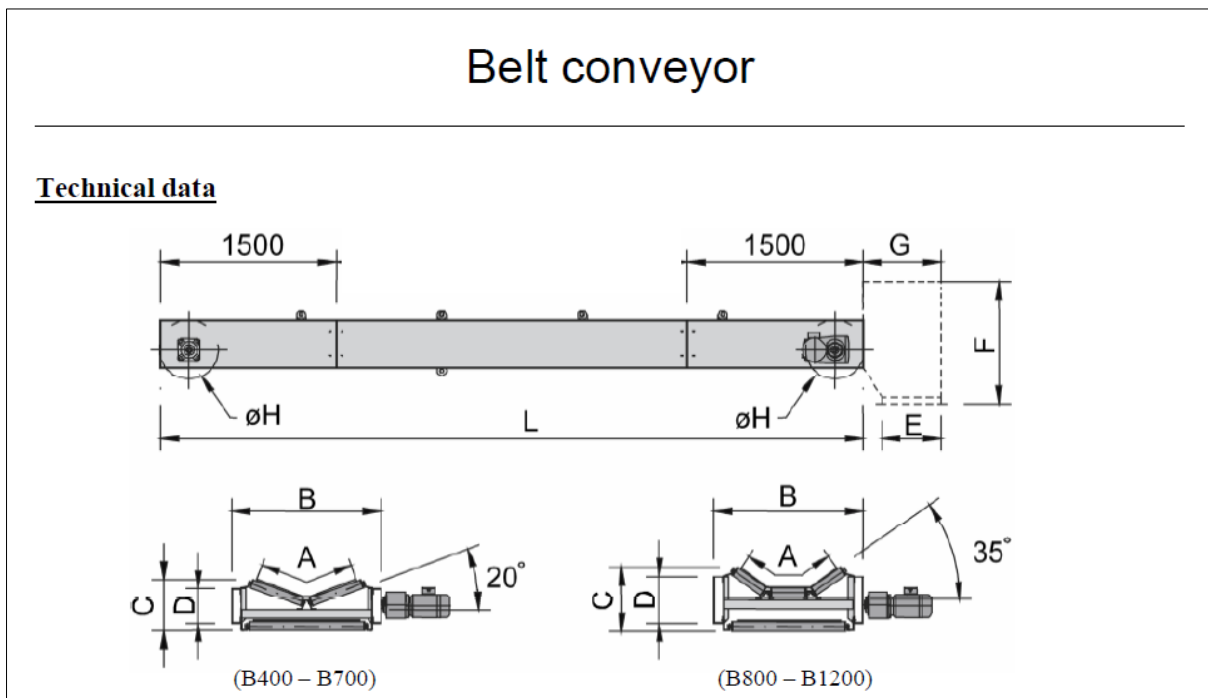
Example of an engineering schema from a belt conveyor user manual [9].
